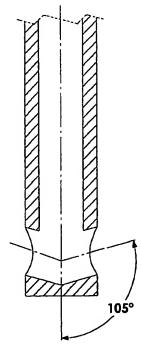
Section View of a Casting Nozzle with Design Turning Angle of 105 Degrees
